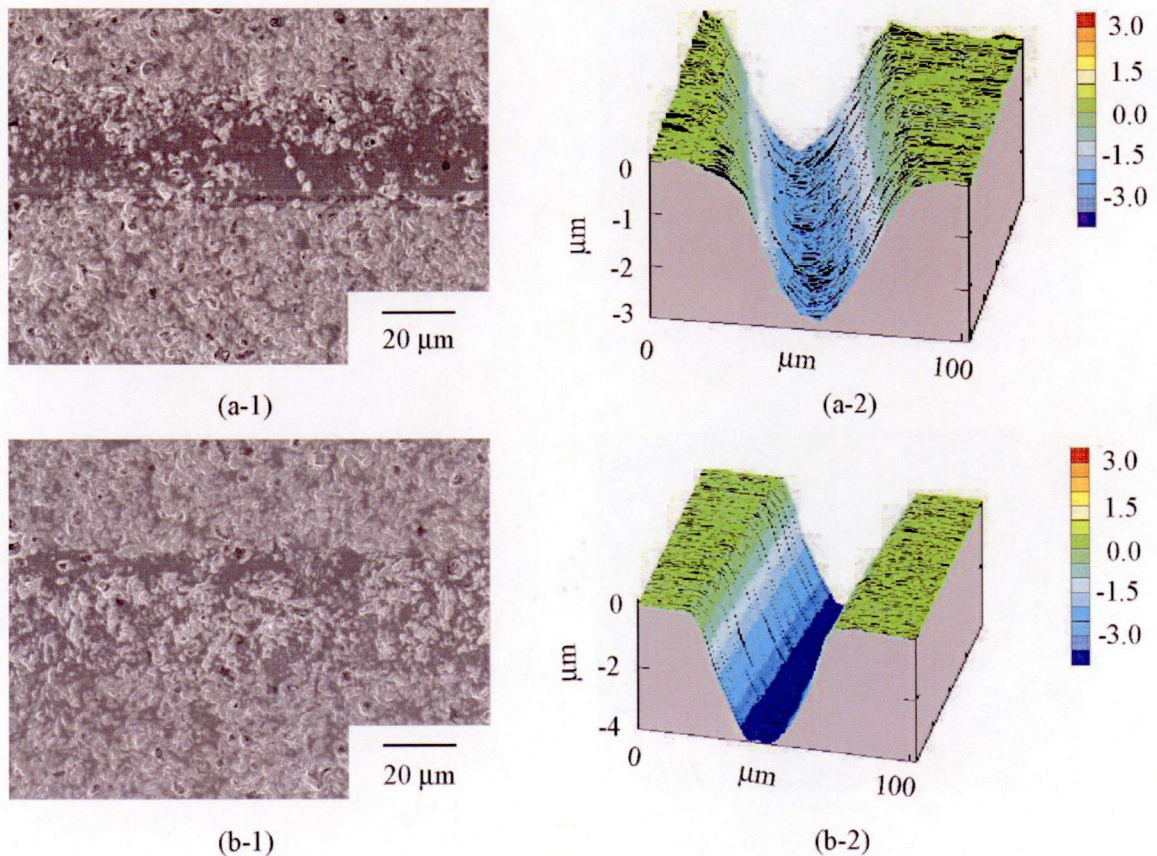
Microgrooves machined by cutting point swivel machining
